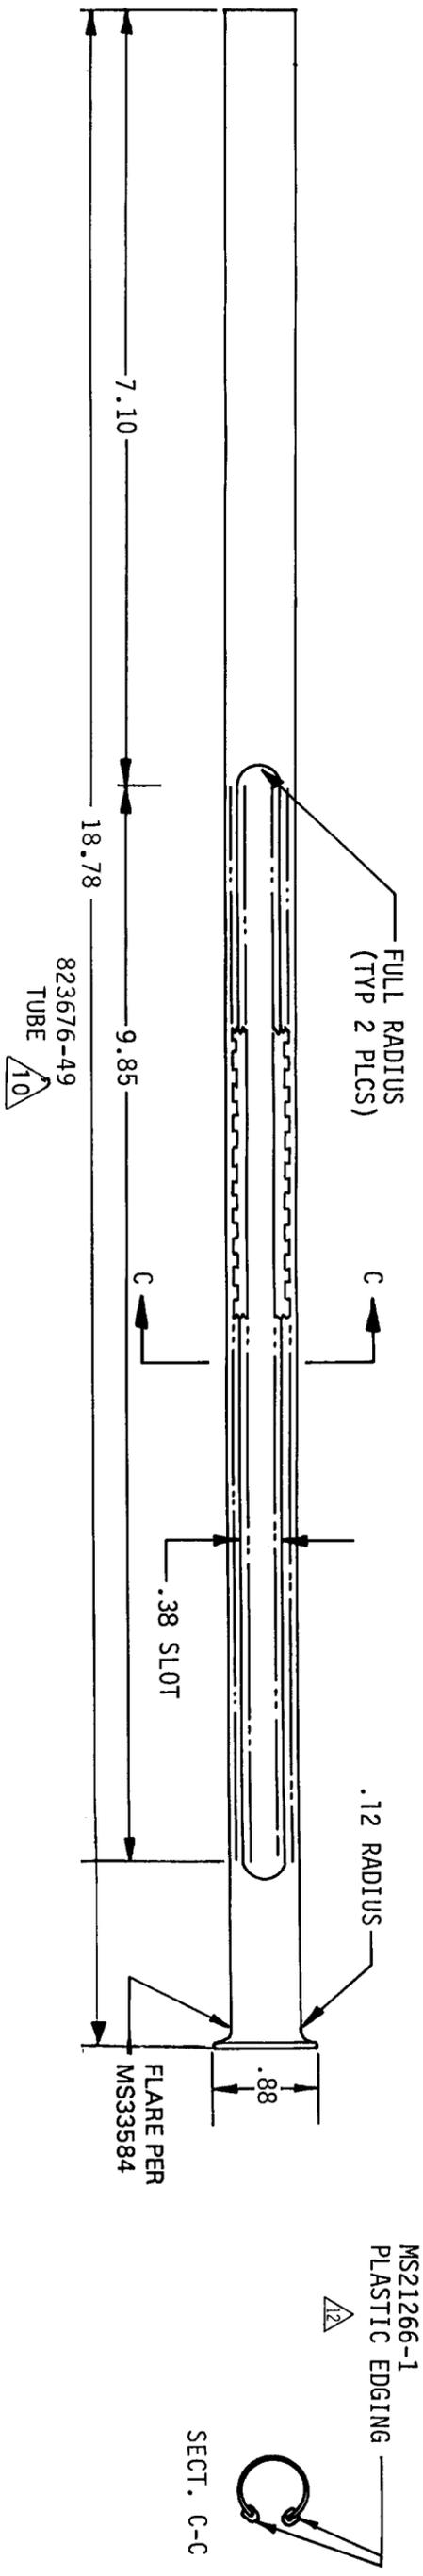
BUNGEE ASSEMBLY
